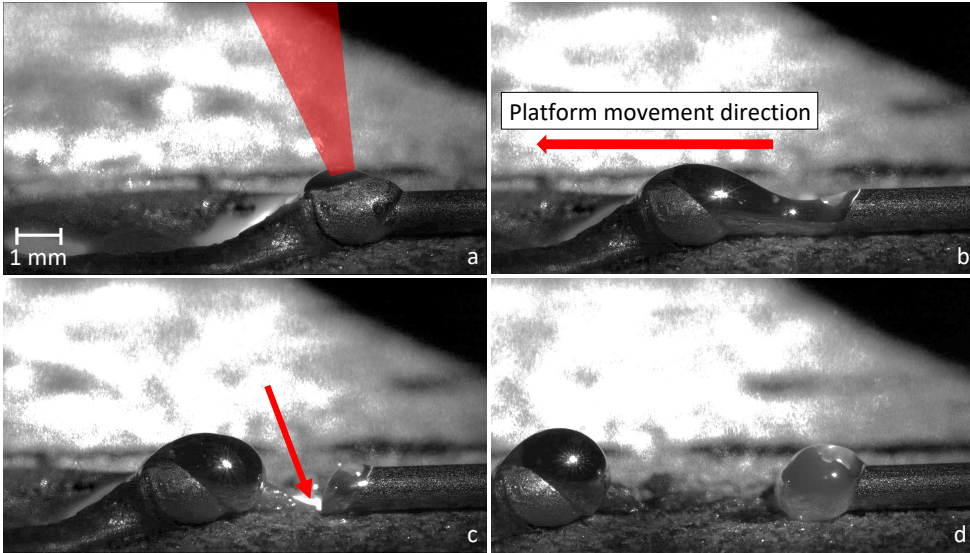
High-speed footage of an attempt to weld a stainless steel wire to olivine [81]. Frame a shows the laser beginning to melt the wire. Frame b is 288 ms later; the laser passed over the bulb, and has begun heating the wire. Frame c (at 308 ms) shows the wire breaking. The arrow shows that the laser spot covers both the wire and the olivine. Frame d (at 528 ms) shows the molten bead following the laser spot as it melts more wire.
